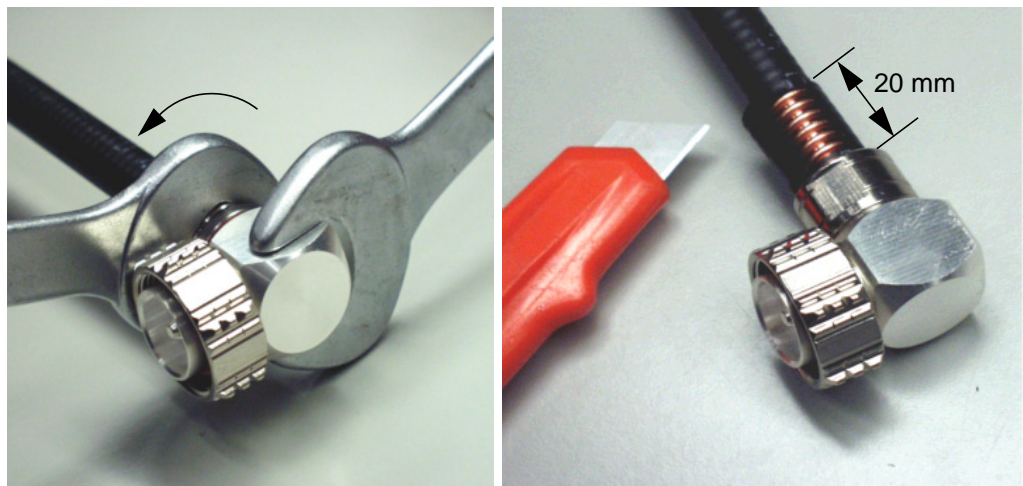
Fixing of connector unit , removal of outer insulation
